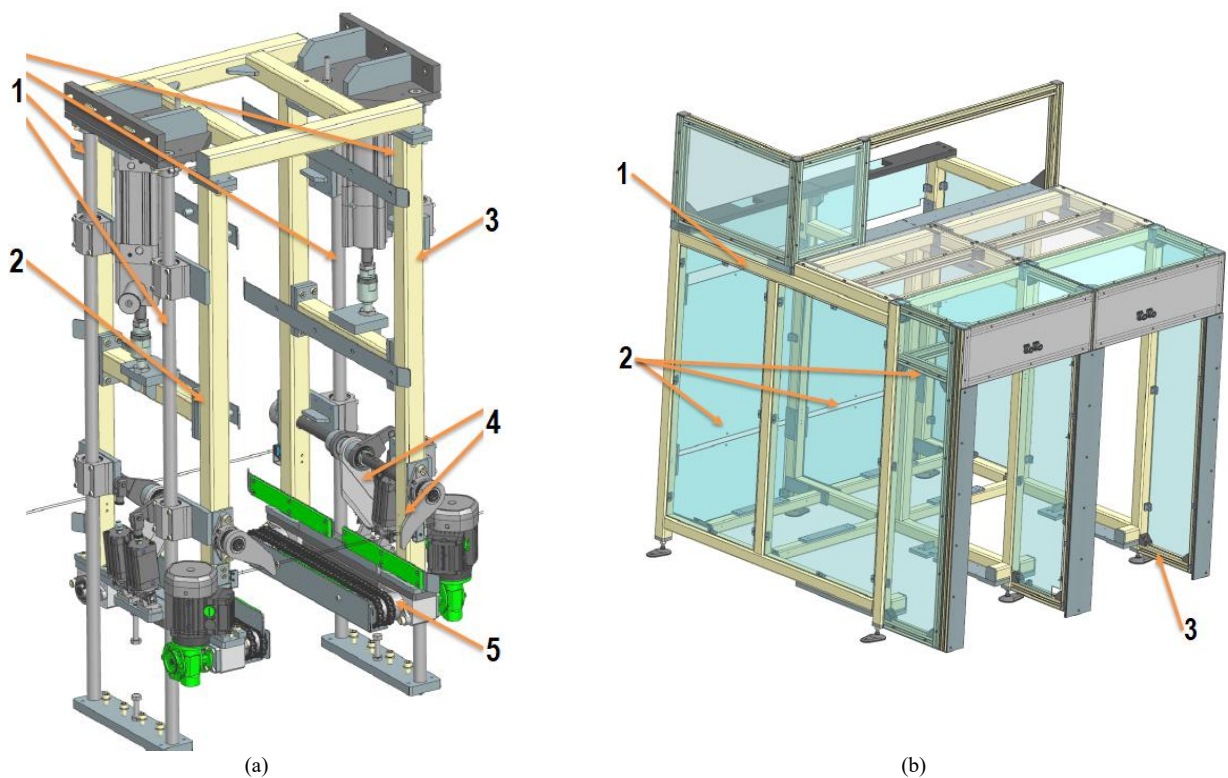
The removal mechanism (a): 1 – linear guides, 2 – frame, 3 – pneumatic cylinder, 4 – separation mechanism, 5 – chain conveyor; and the frame structure of the designed feeder (b): 1 – frame, 2 – mechanical covers, 3 – front frame.
